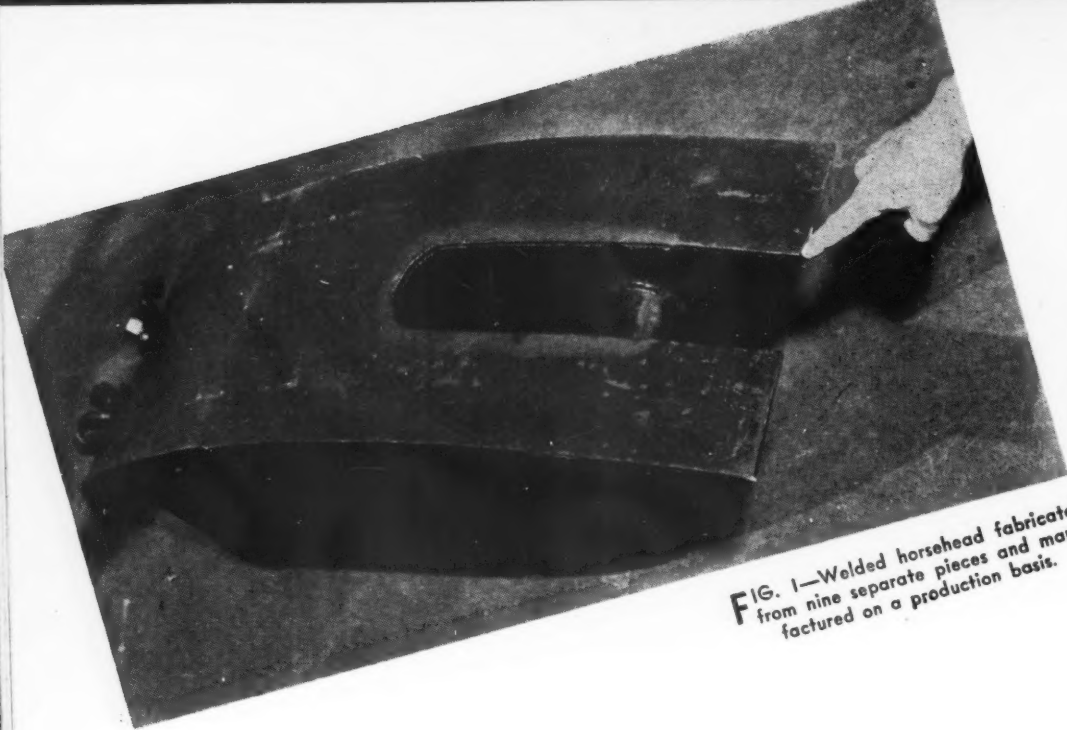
Welded horsehead fabricated from nine separate pieces and manufactured on a production basis.
